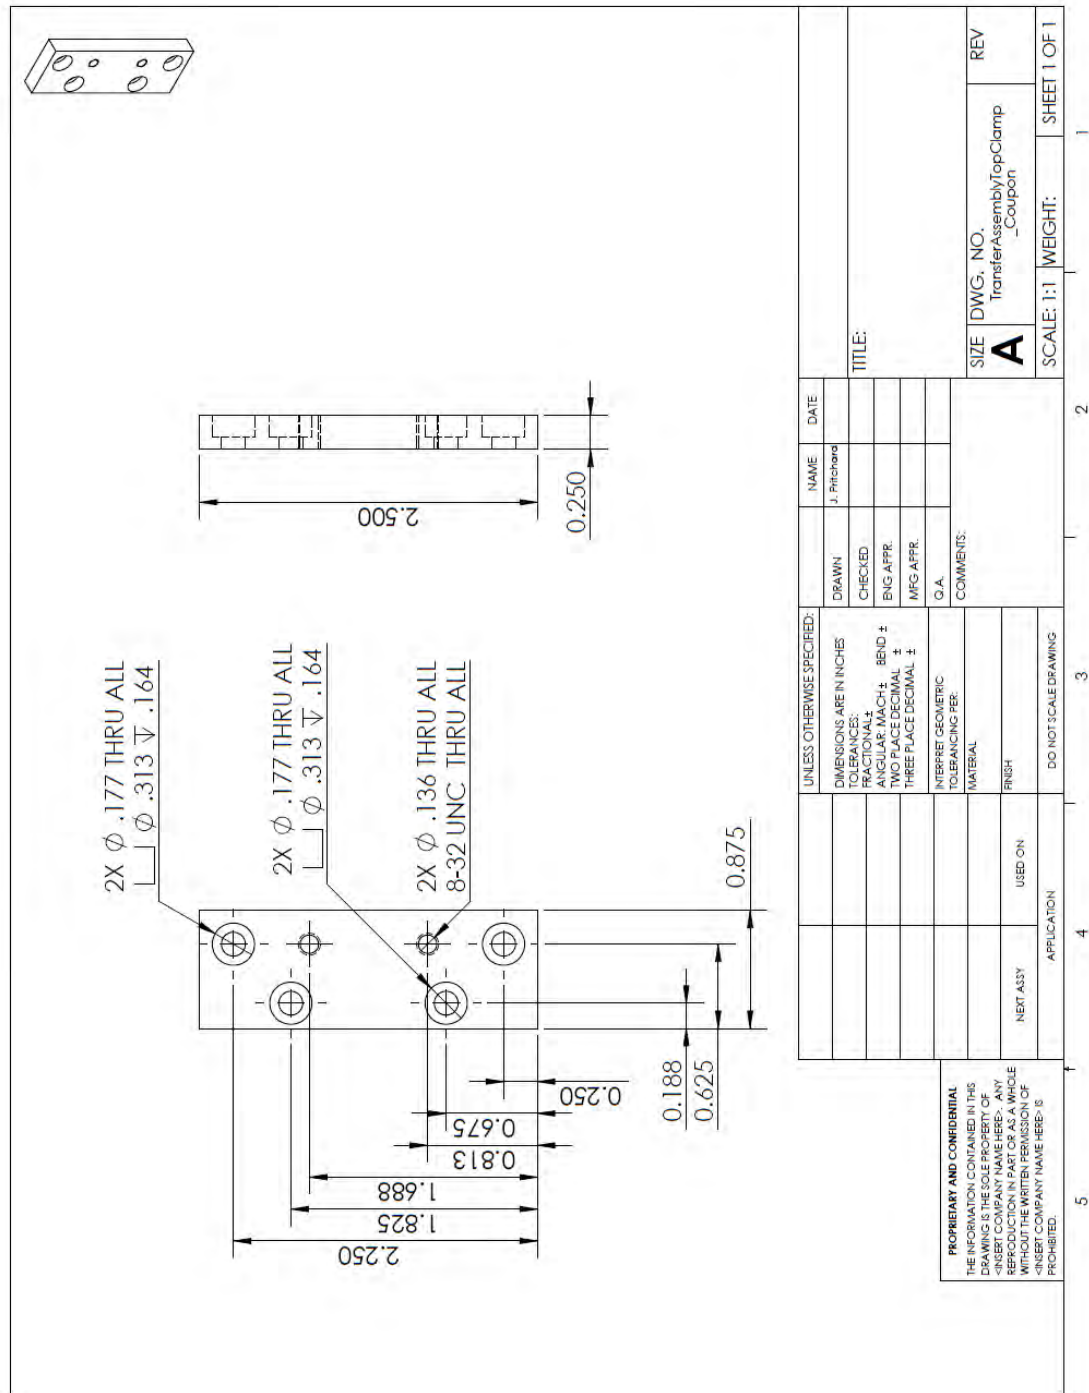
Dimensional drawing of upper ribbon clamp used in coupon size transfer assembly.
